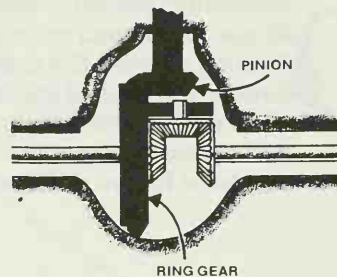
A drive pinion gear is in mesh with a ring gear attached to the carrier. (GMC Truck and Coach Division of General Motors Corporation)
